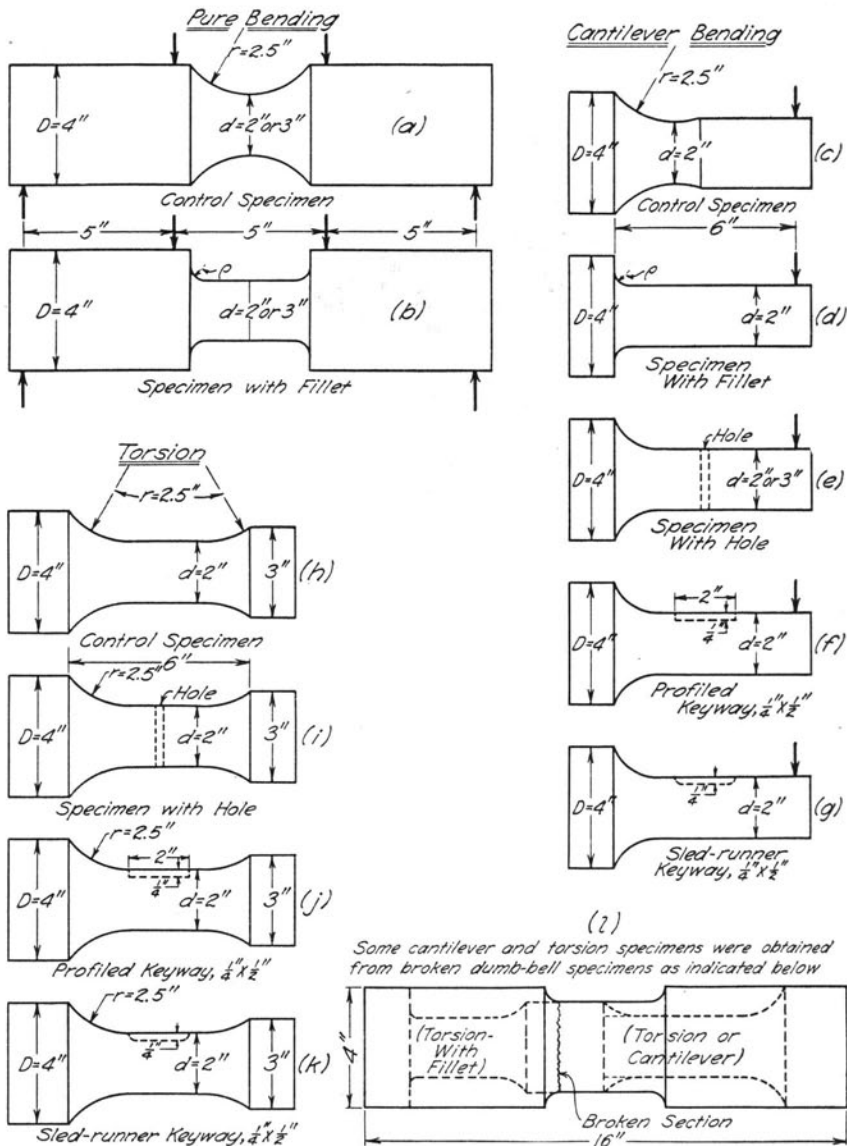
FORM AND DIMENSIONS OF CYLINDRICAL SPECIMENS USED
